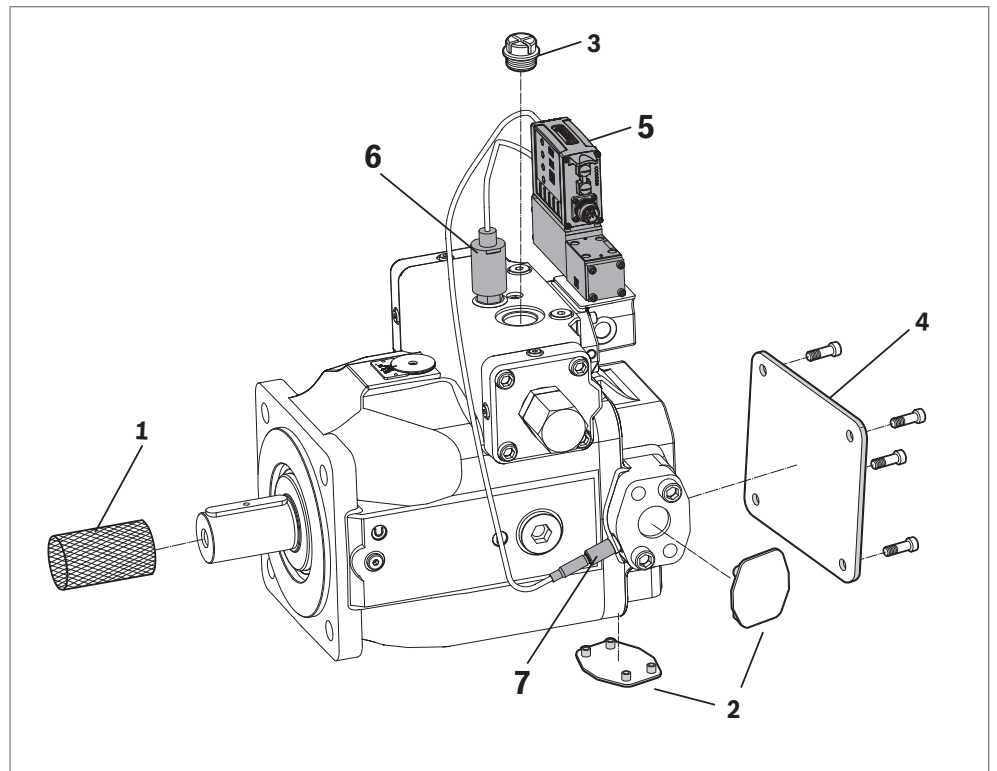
Example: Axial piston unit A4VSO with HS5EP control system, clockwise rotation with through drive
